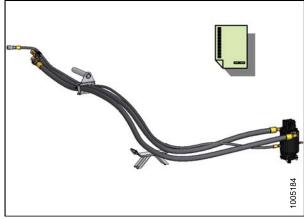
M205 Hydraulic Drive Kit (MD #B5456)
